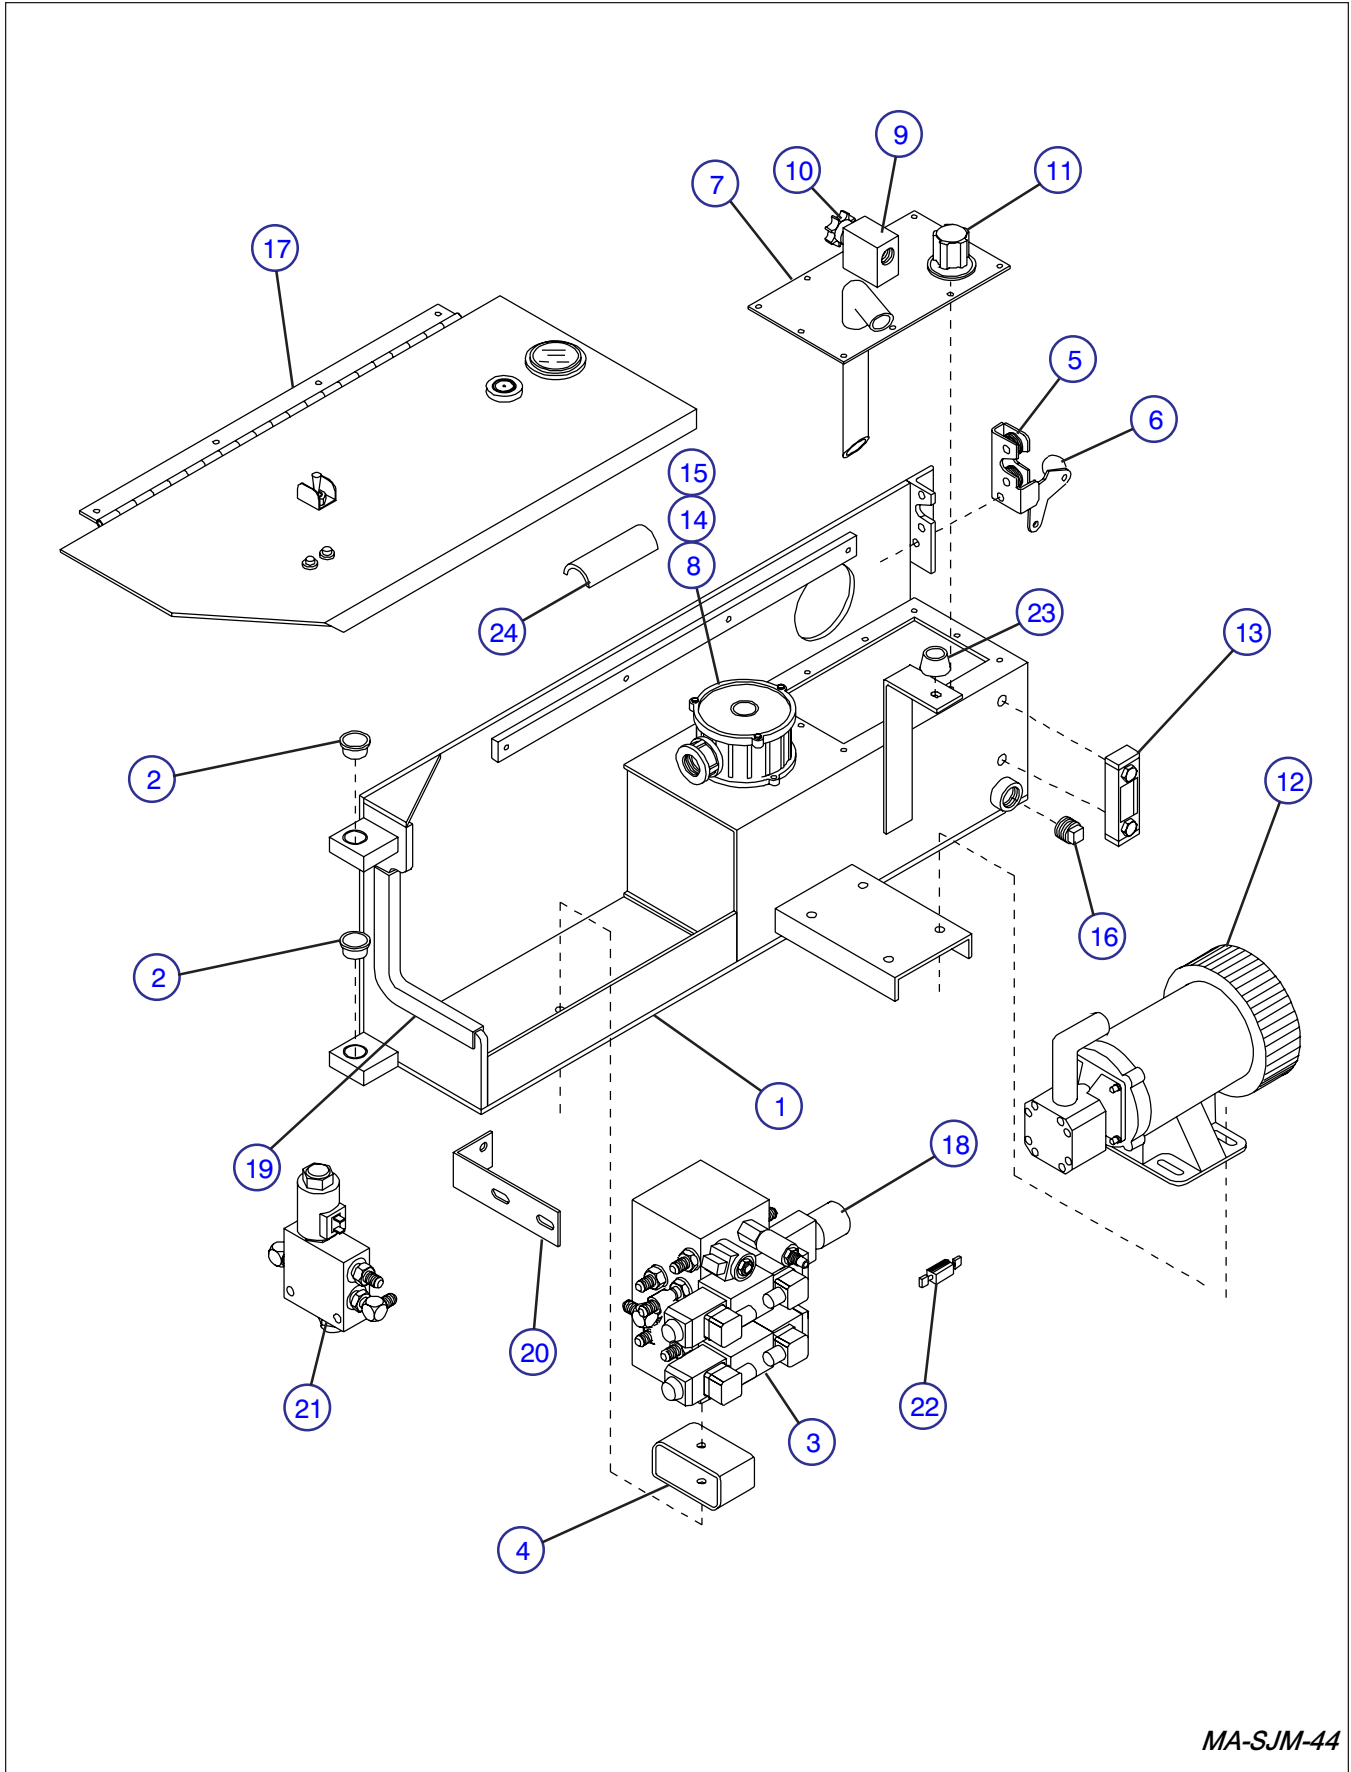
PROPORTIONAL VALVE MANIFOLD ASSEMBLY
